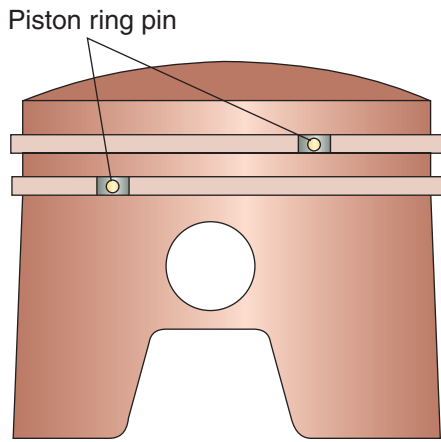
Pins installed in the two-stroke piston prevent the piston rings from rotating.
